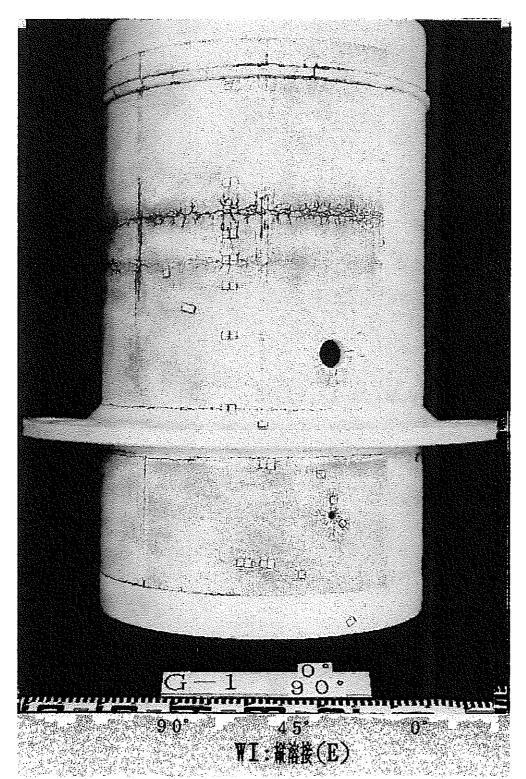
Photograph of initiated cracks on the surface of the inner vessel after 1055 cycles (SUS304 0° - 90° ref: Fig.A4.1)
